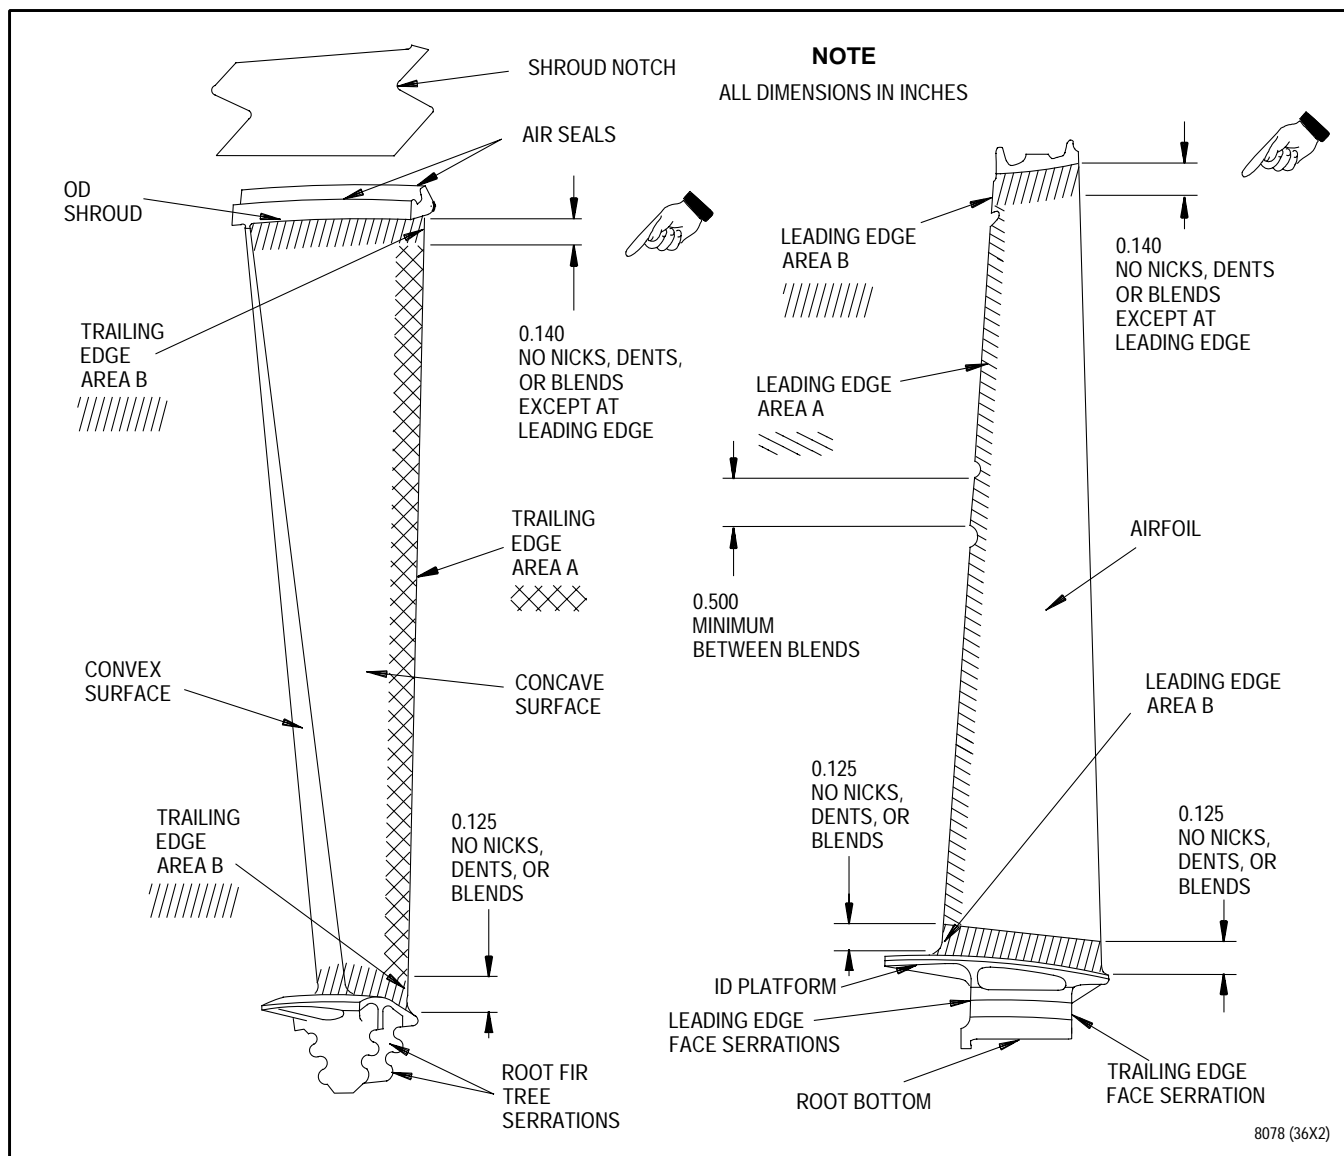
Third Stage Turbine Rotor Blades - Blend Repair
